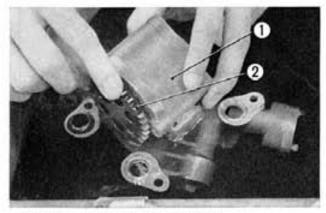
(i) Oil pump assembly (ii) Oil pump drive gear
